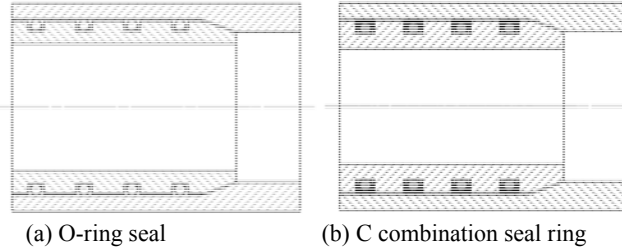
Schematic diagram of sealing of pipe joint in drill pipe of double drill pipe
